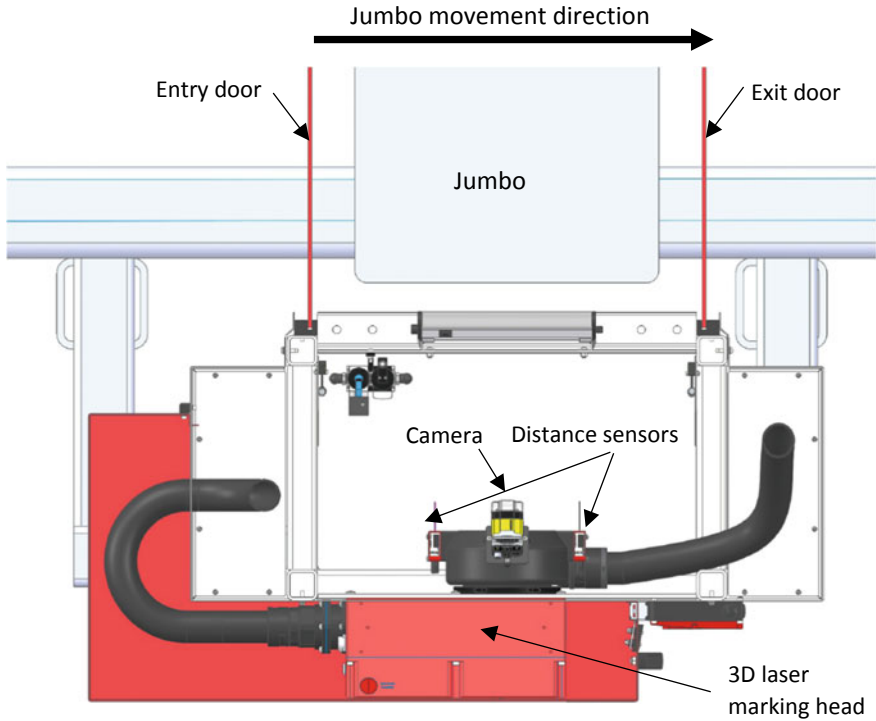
Top sectional view of the laser marking machine to mark the sides of the parts
